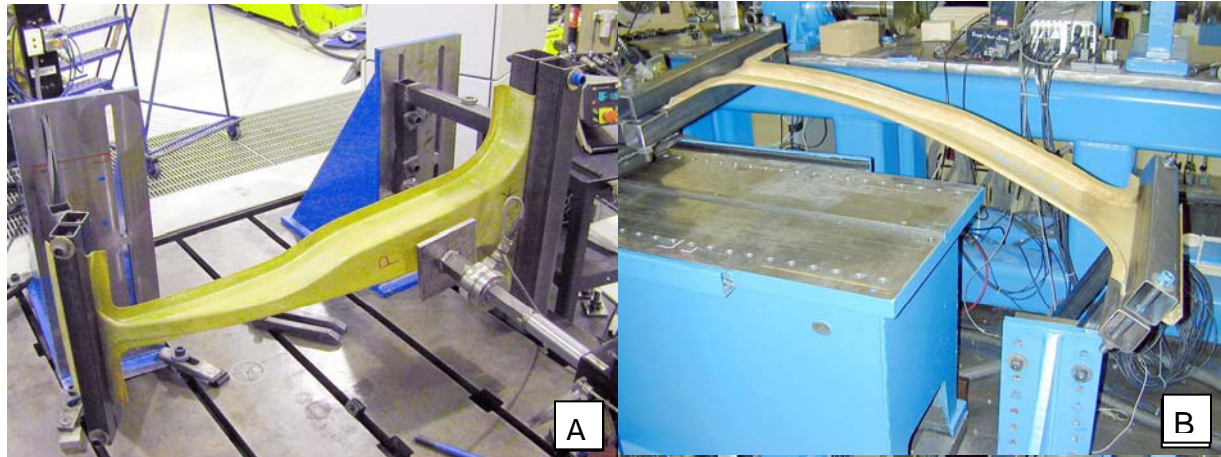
B-pillar test setup: A. Outer panel in 3-point bend. B. Inner panel in torsion.
